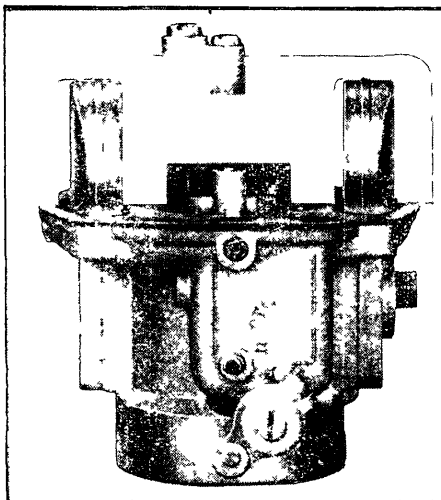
LL Checking float level on Rochester BC carburetor. 1951-52 Pontiac Six
